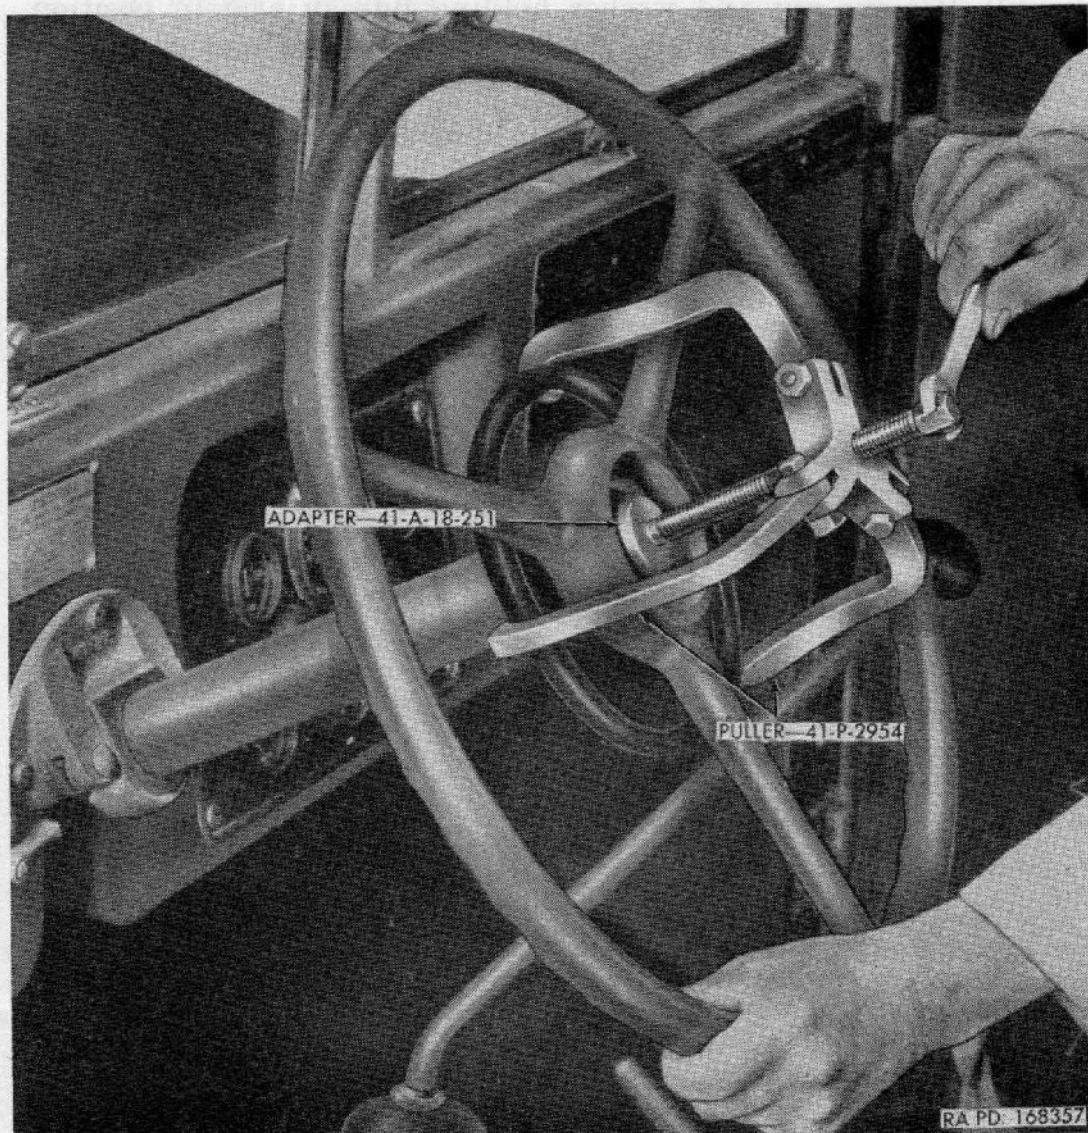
Removing steering wheel with puller 41-P-2954 and adapter 41-A-18-521.
